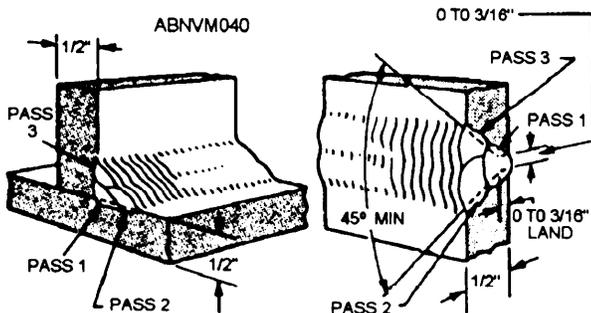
Joint design and weld pass sequence horizontal-position multipass fillet and butt welds.
